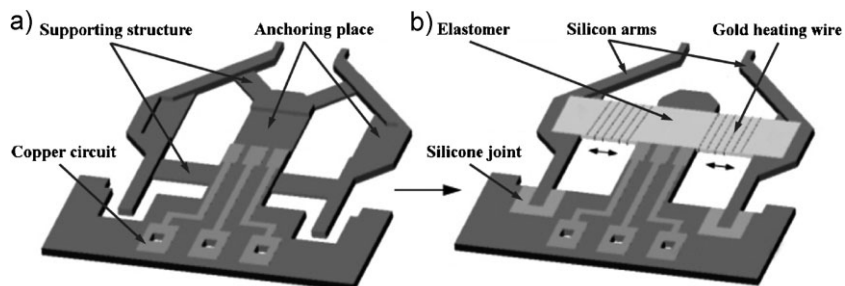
Detail of the LCE actuator and its components: a) silicon carrier during batch manufacturing, b) elastomer mounted onto the finished gripper mechanism (elastomer dimensions: $16 \times 4 \times 0.030 \text{ mm}^3$; arm length: 20 mm; frame dimensions: $22 \times 25 \text{ mm}^2$).
